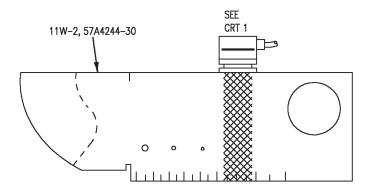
Inner Wing Lower Surface Titanium Splice Fitting Inspection Areas (Sheet 6)
